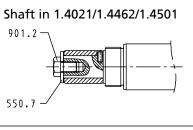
Dismantling the plain bearing - axial suction nozzle
